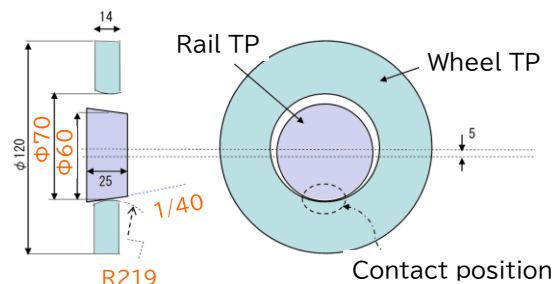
Specimen geometry and contact position (in mm) of the new twin disc tester
